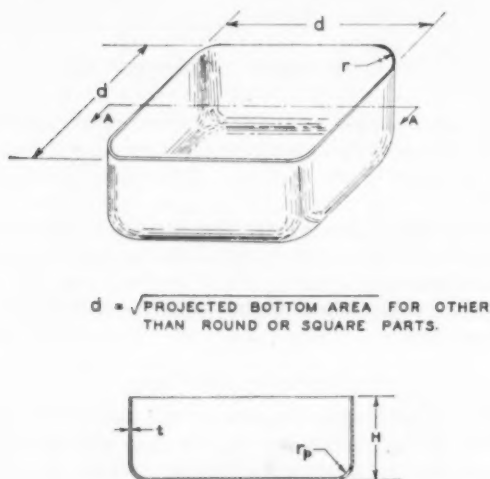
BASIC DIMENSIONS OF DRAWN BOX-TYPE PART
